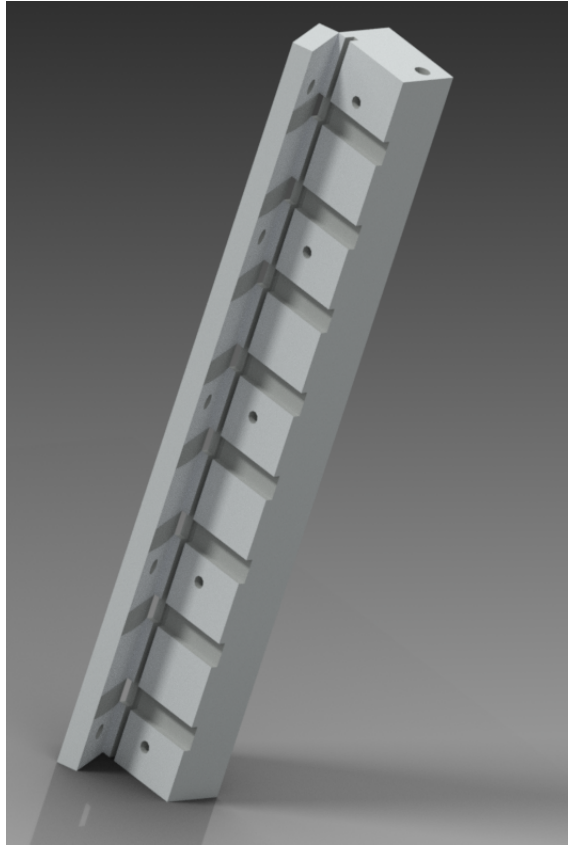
CAD image of the comb-style ring support piece. A recess for each ring can be seen along the length of the thicker part. The thinner, enclosing, piece shows the rounded extrusion. Along the length of the thick piece runs a channel in which the resistors would be housed.
